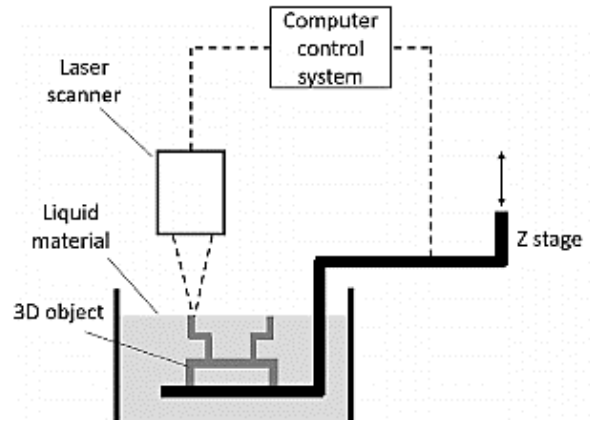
3D printer components: Stereolithography (SLA) [29 – 31]
